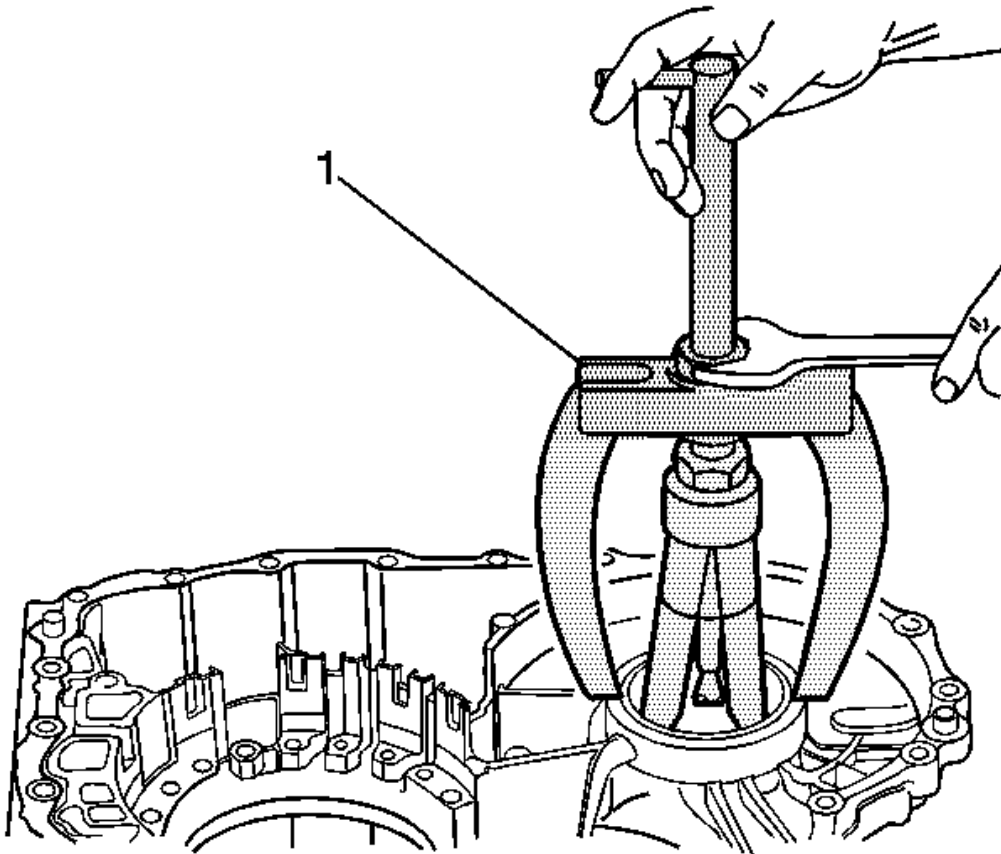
Torque Converter Housing With Fluid Pump Assembly (6T40/45/50)
